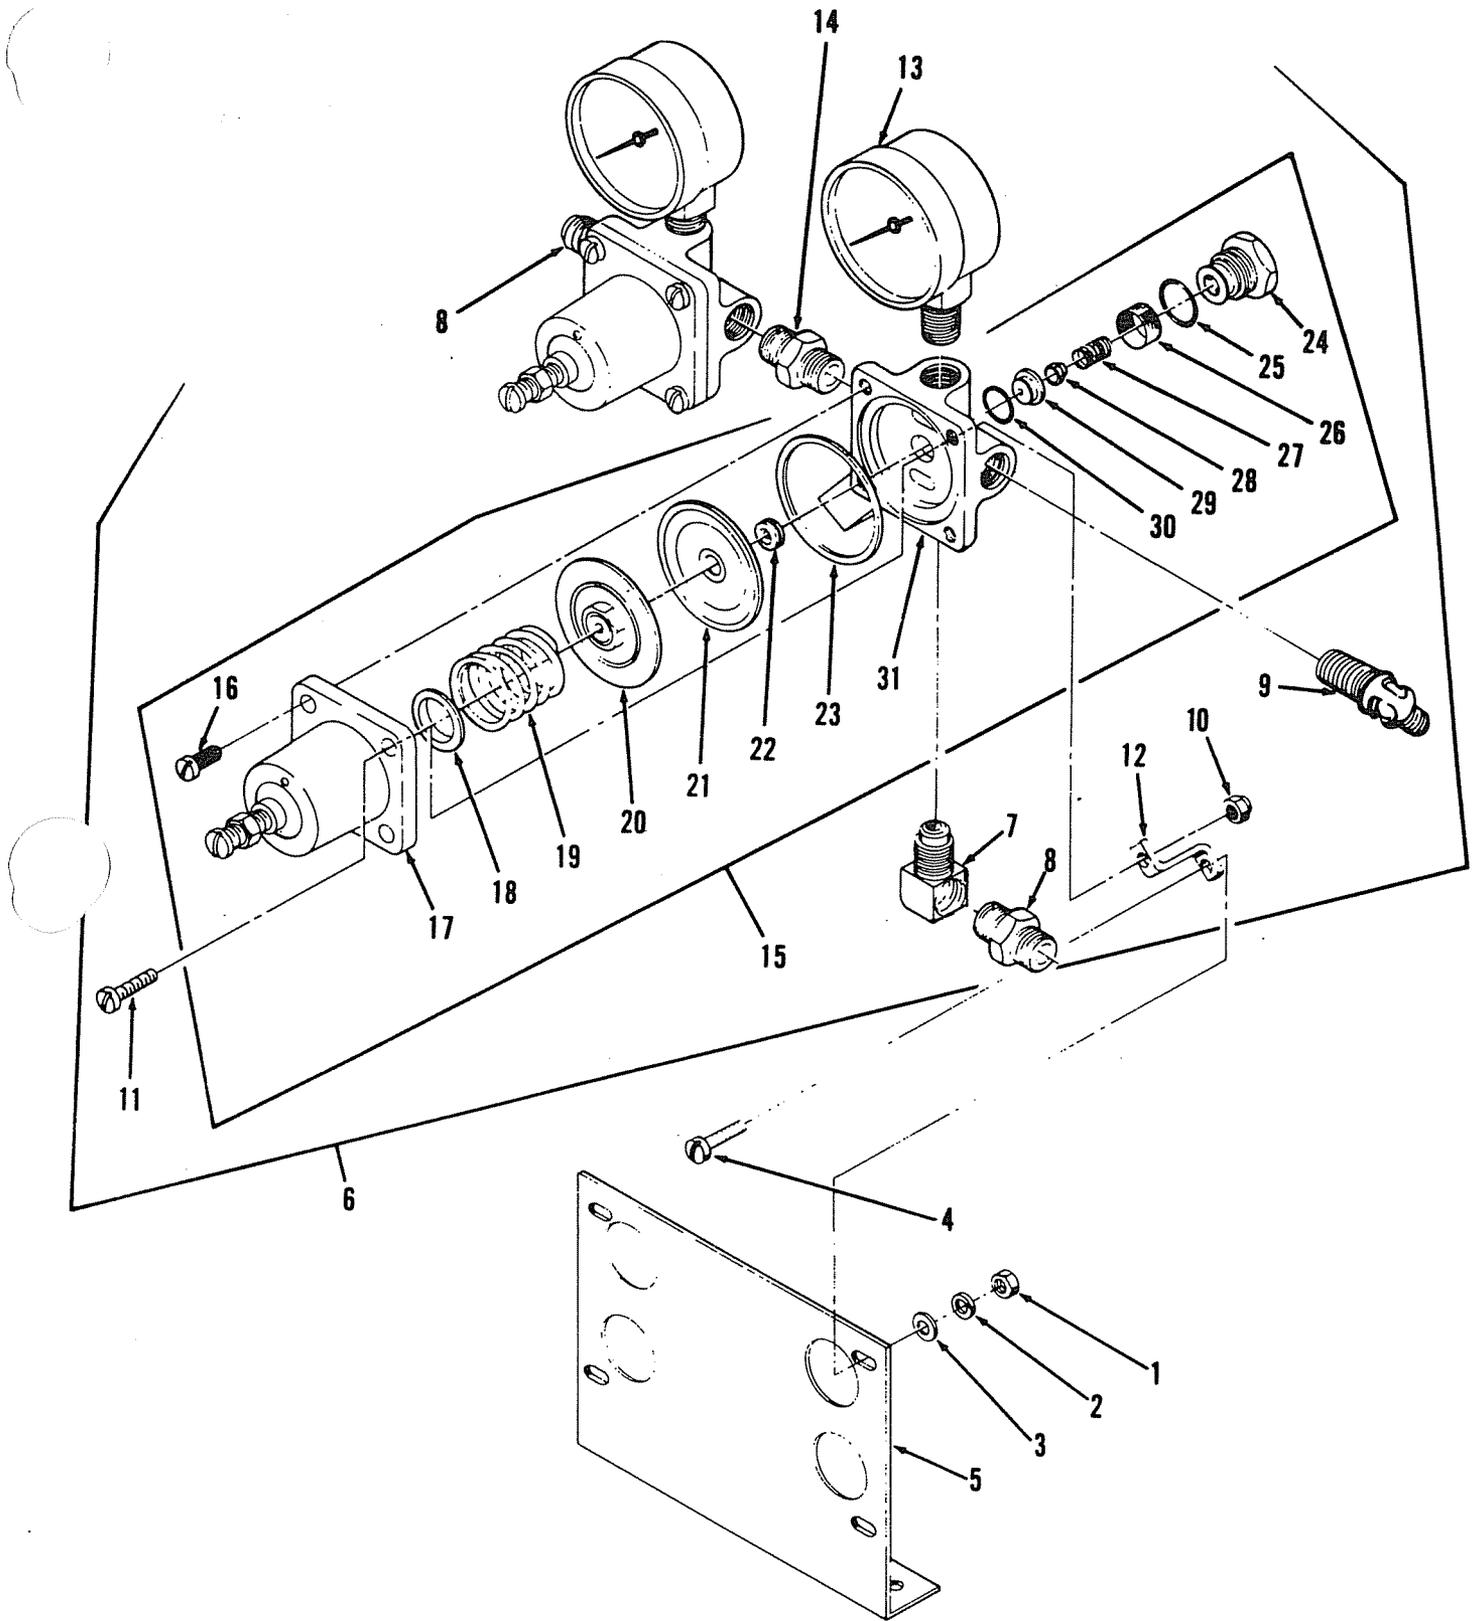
SECONDARY CO₂ REGULATORS AND BRACKET ASSEMBLY
